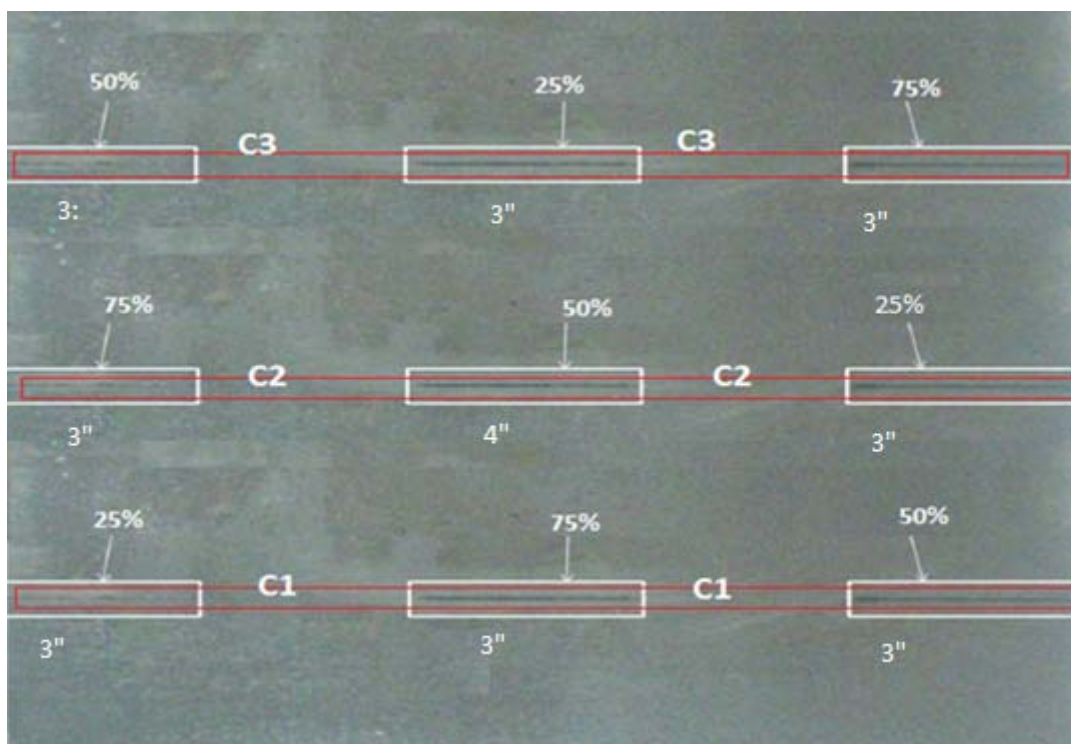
4mm steel plate, showing the depth and location of defects
